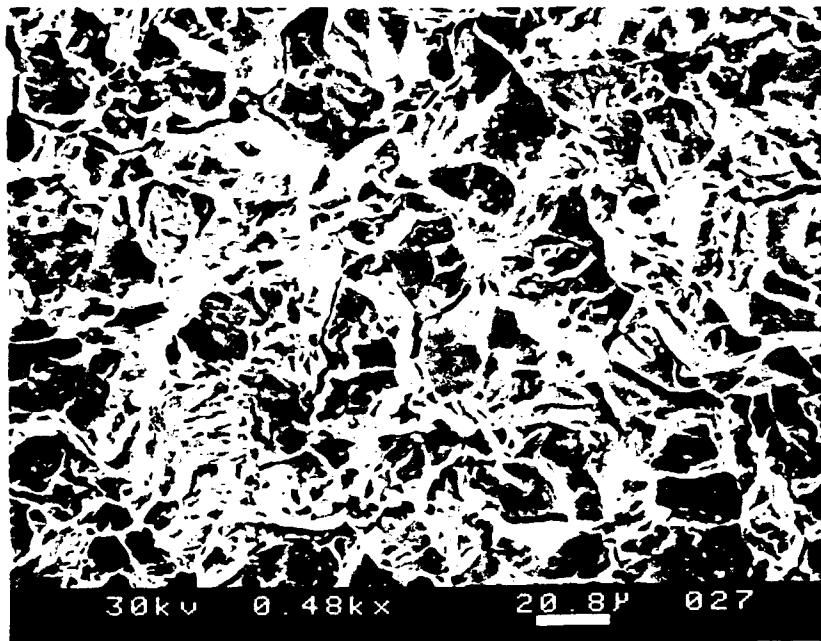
Fractograph of secondary crack showing intergranular cracking. Secondary emission (480X).
